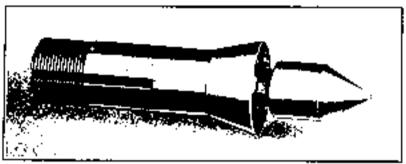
Center and Center Chuck — center has taper fit in center chuck (solid collet). Center chuck fits headstock spindle
